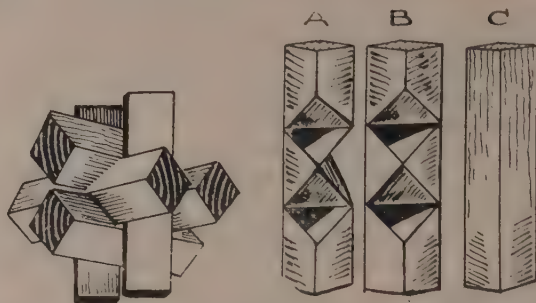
DIAGONAL CHINESE CROSS PUZZLE. (TWO PIECES REQUIRED OF A, THREE OF B AND ONE OF C.)
